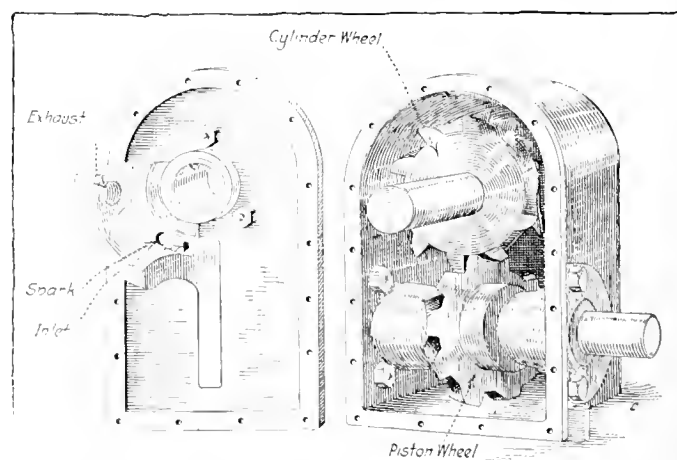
INTERIOR OF SANDERS EXPERIMENTAL TURBINE (right) AND INTERIOR OF THE COVER AND SHROUD WHICH FITS INTO THE HOLLOWED PERIPHERY OF THE TOP ROTOR OR CYLINDER WHEEL (left)
